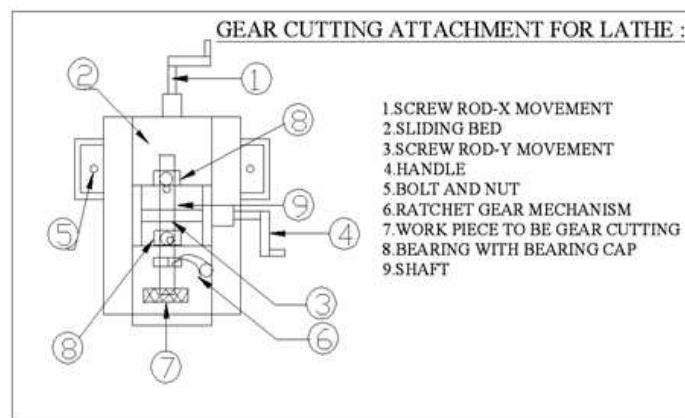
Gear Cutting Using Ratchet and Pawl type indexing Method
